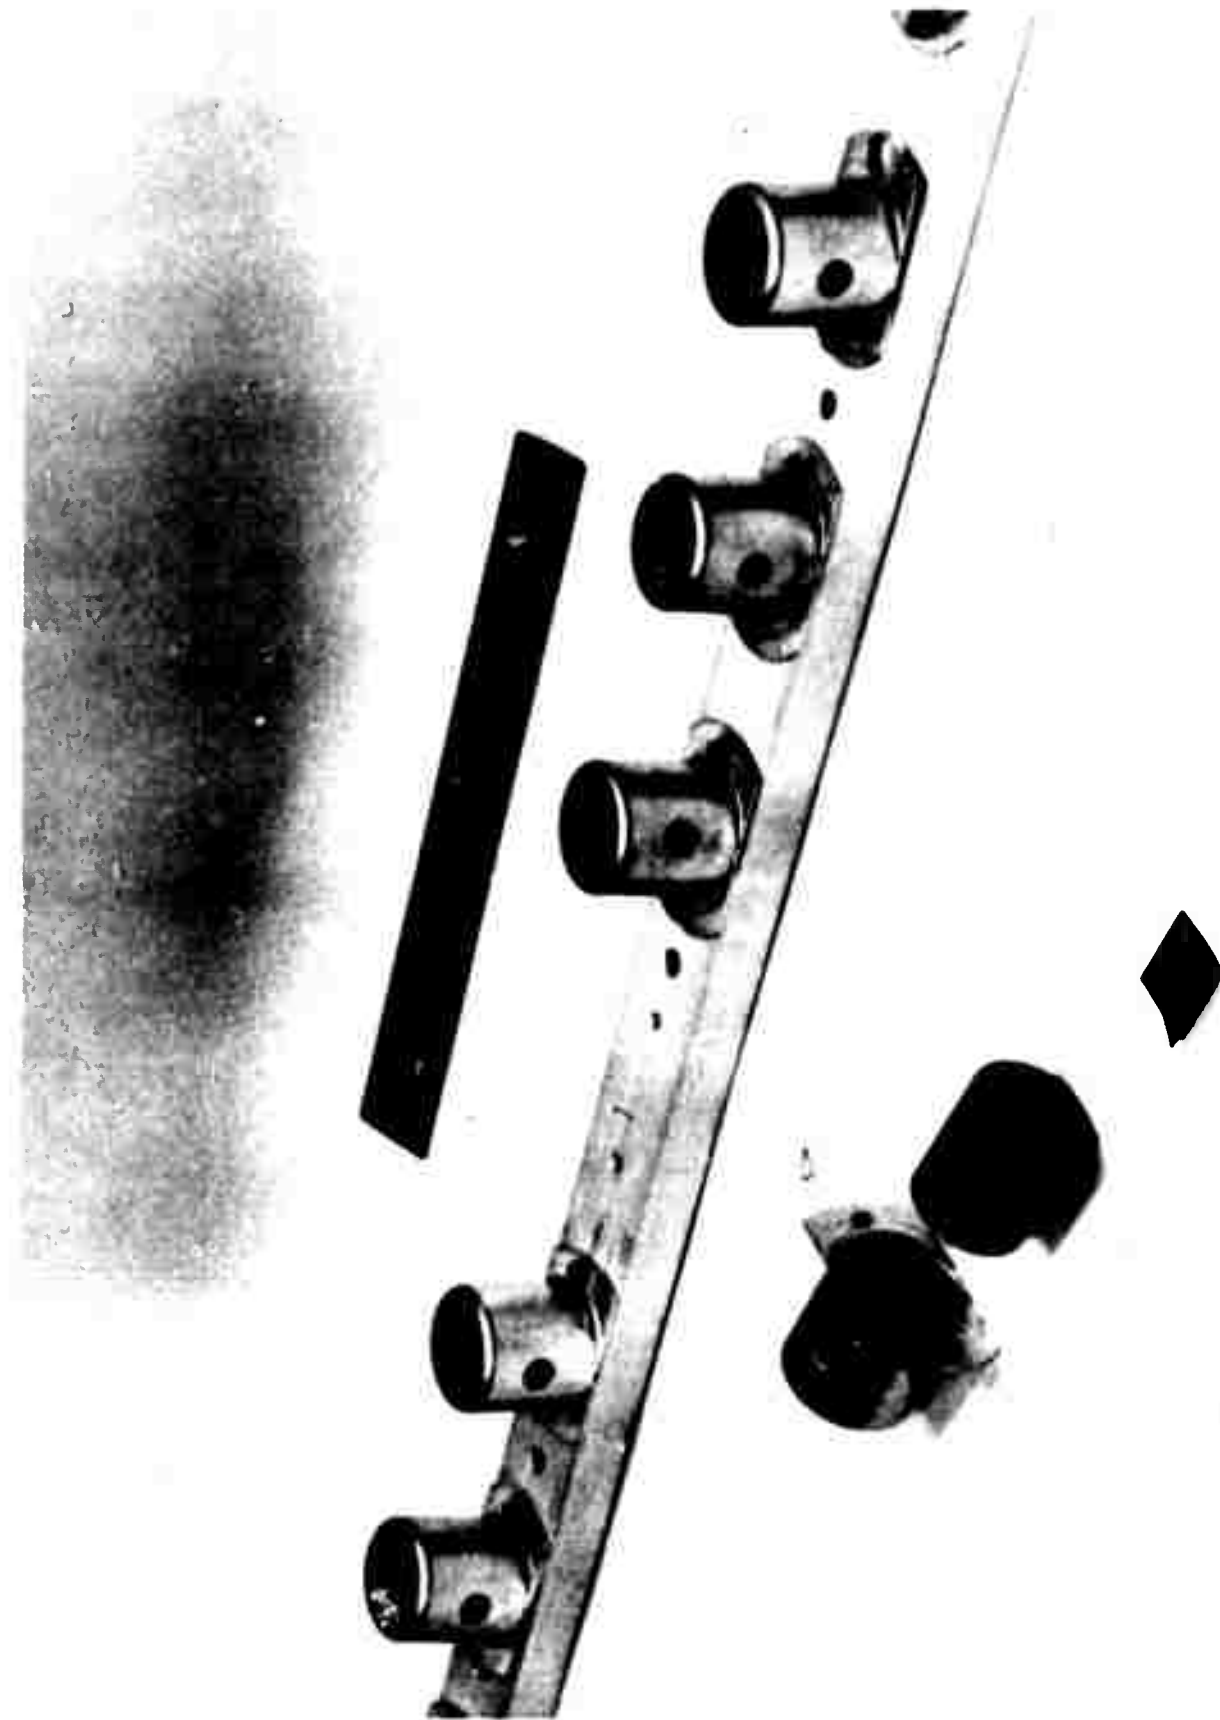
Magnets Mounted on Support Bars. Exploded View Shows Aluminum Can, Magnet, and Spring Spacer.
